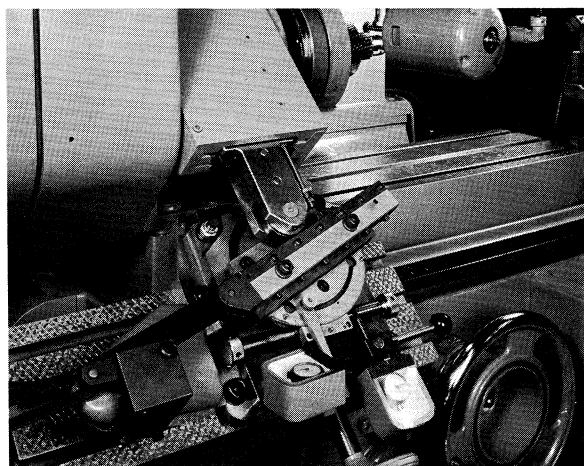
Sine bar mechanism for rotating the work gear in timed relationship with the table stroke to produce helical lead on a shoulder gear.
